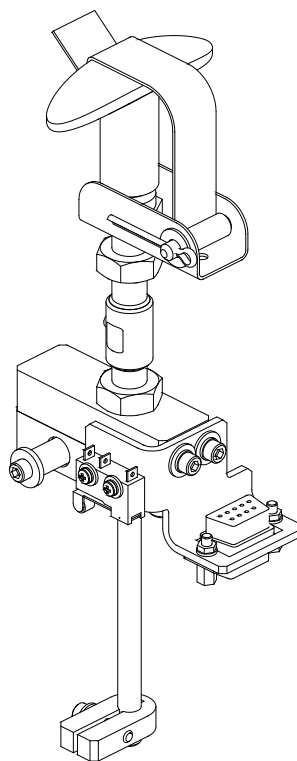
Landing Gear Handle Assembly
